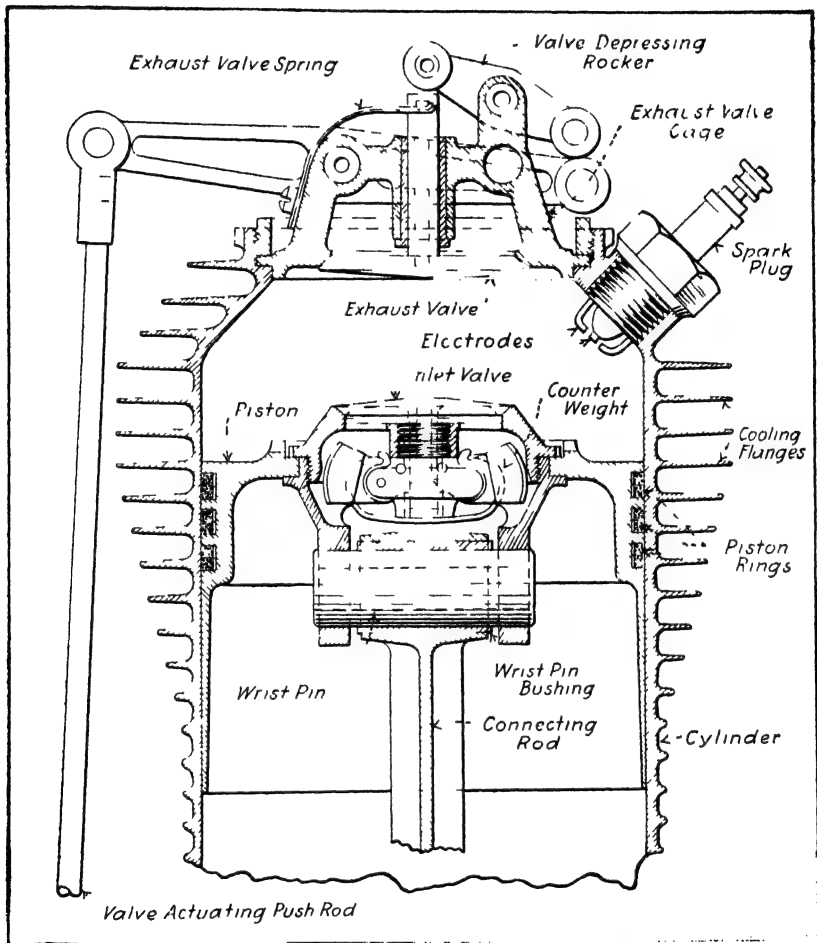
Sectional View of Early Type Gnome Cylinder and Piston, Showing Construction, Application, and Method of Operation of Inlet and Exhaust Valves.
